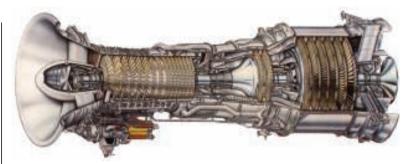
This gas turbine is a hot-end drive machine. A gas turbine is selected as a compressor driver based on available fuel and plant-specific requirements
